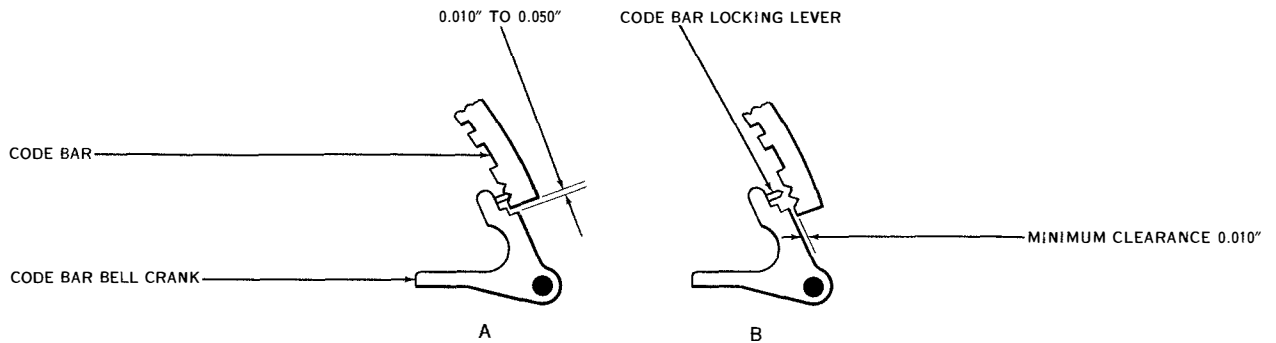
Code Bar Bell Crank and Main Bail Adjusting Screw
